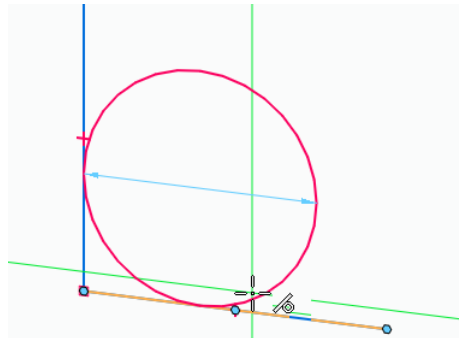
Circle drawn using the *Tangent Circle* tool
